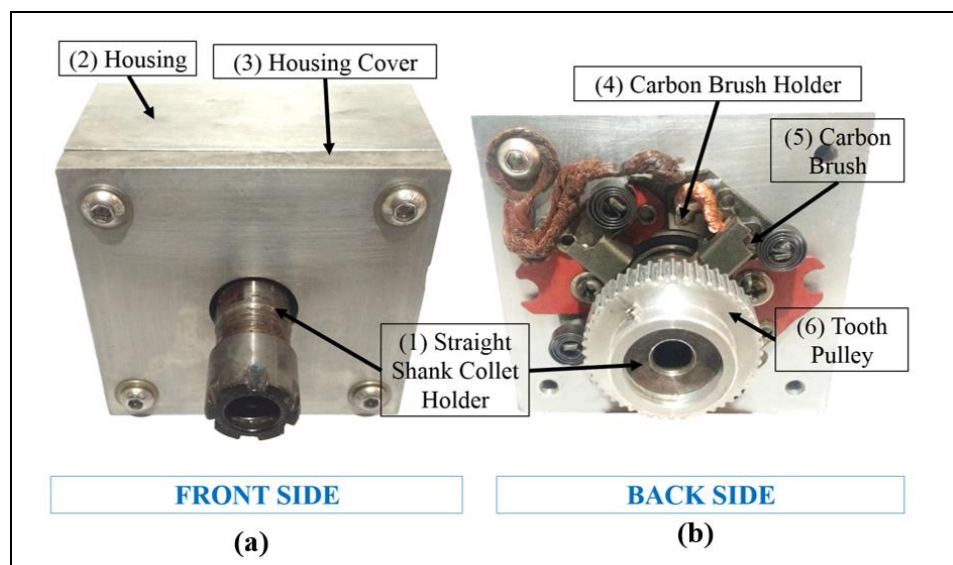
Pre-assembly rotary spindle and housing (a) Front side (b) Back side.
